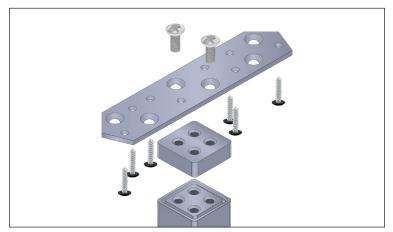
Figure L. Attach the spacing block to the post before attaching the top mounting plate.
